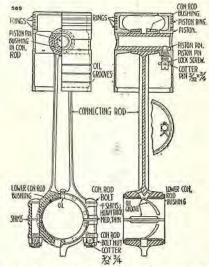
A connecting rod showing piston-pin bushing and crank-pin bearing and cap. The bearing is in the small end of connecting rod for the piston pin. The piston pin is stationary.
